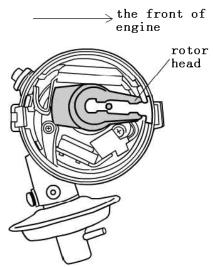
The position of rotor head when the piston in No.1 dylinder is at TDC compression stroke
